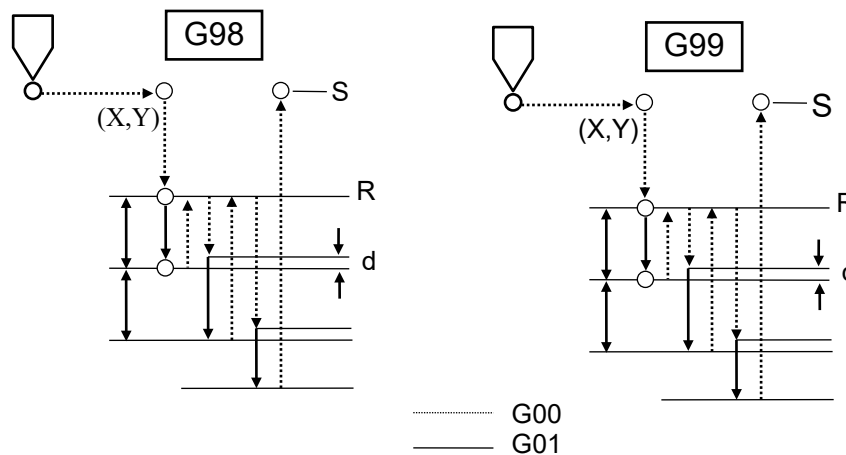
G83 Deep Hole Drilling Canned Cycle
